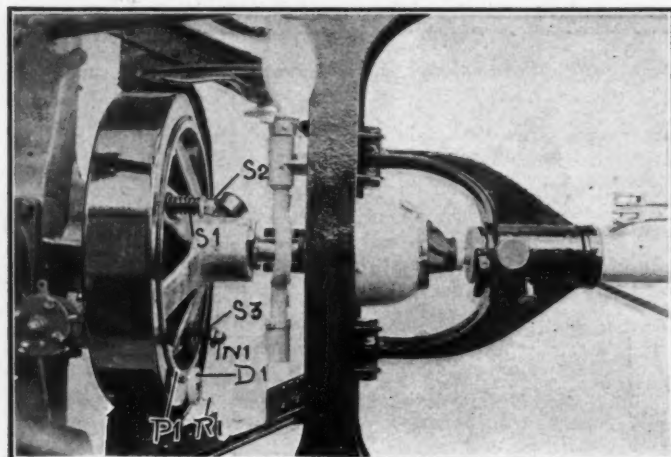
Plan of the chassis at the combination cross-bar, showing cone clutch in flywheel, controlling mechanism and universal joint
